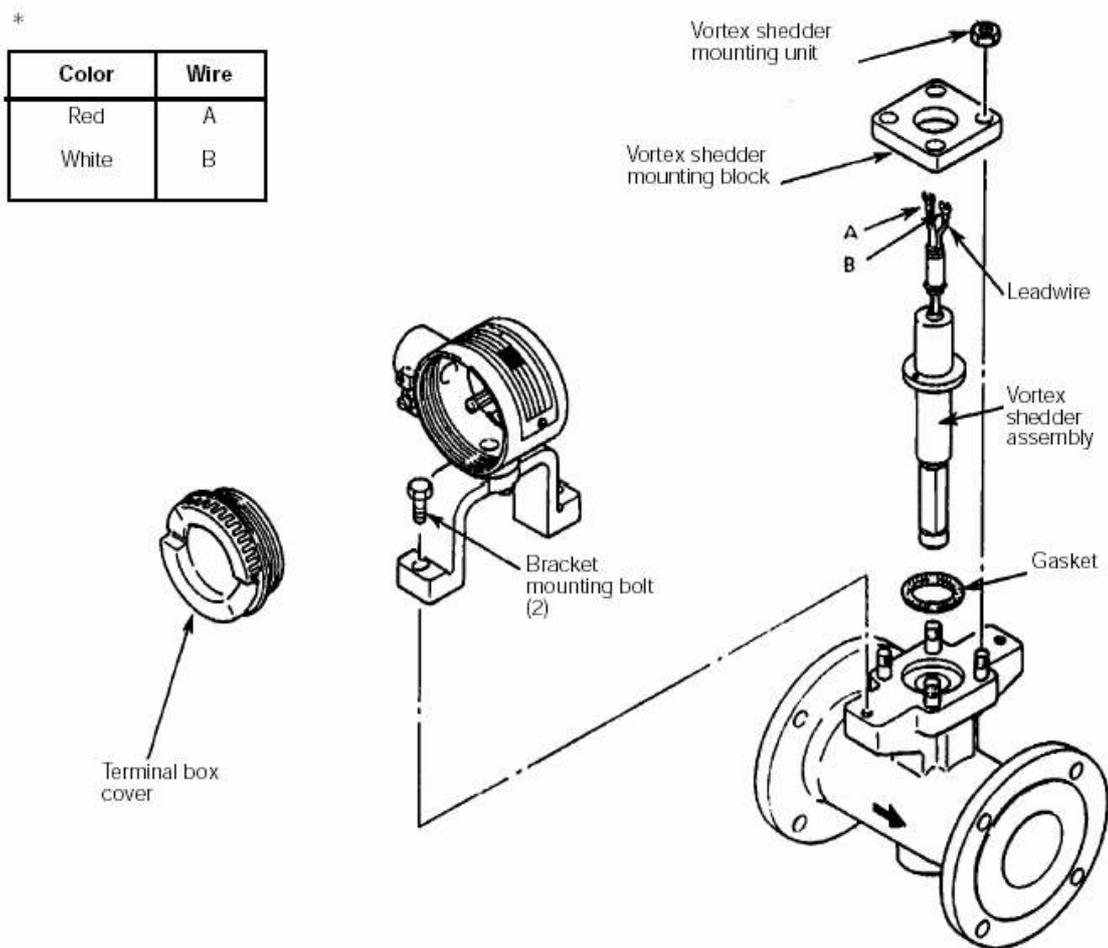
Disassembling and reassembling the Vortex shedder assembly
